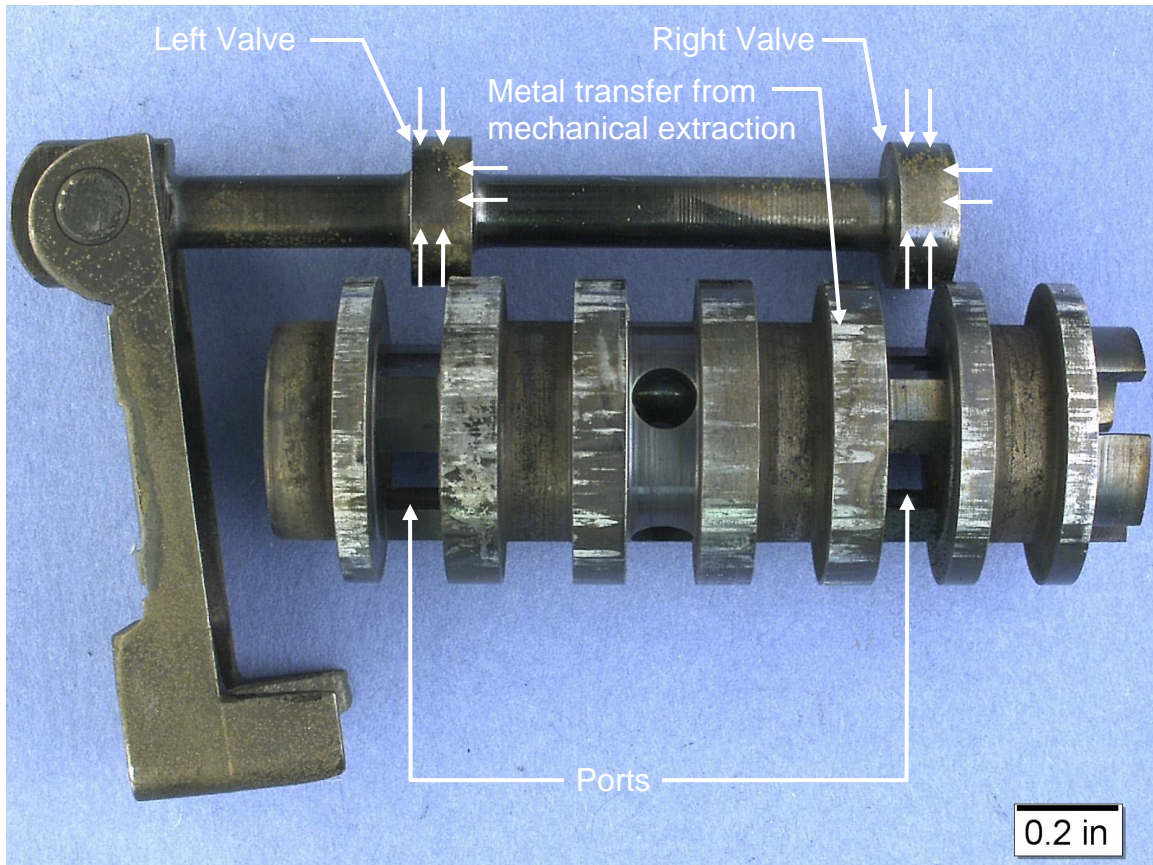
Photograph of the piston and sleeve from the Number 2 engine pilot valve. The valves on the piston have dark rectangular regions indicated by short arrows that are similar in size and shape to the stator vane actuator ports on the sleeve. The outside of the sleeve showed metal transfer marks consistent with the mechanical force required to extract it from the aluminum housing.
